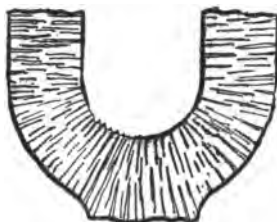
Improved Section of Cast-iron Cylinder—Sketch Showing Arrangement of Crystals.
